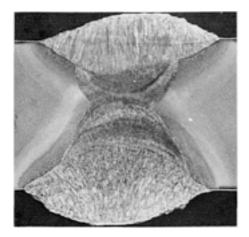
Cross-sectional view of a butt welded joint between two 13-mm $(\frac{1}{2}$ -in.) thick plates of ASTM A517, Grade J, steel. Arc welding and a joint of double-V-groove design were used. Note the columnar structure of the weld metal in the outer portion of the weld. The heat-affected zone is also apparent. 2% nital. 4×
